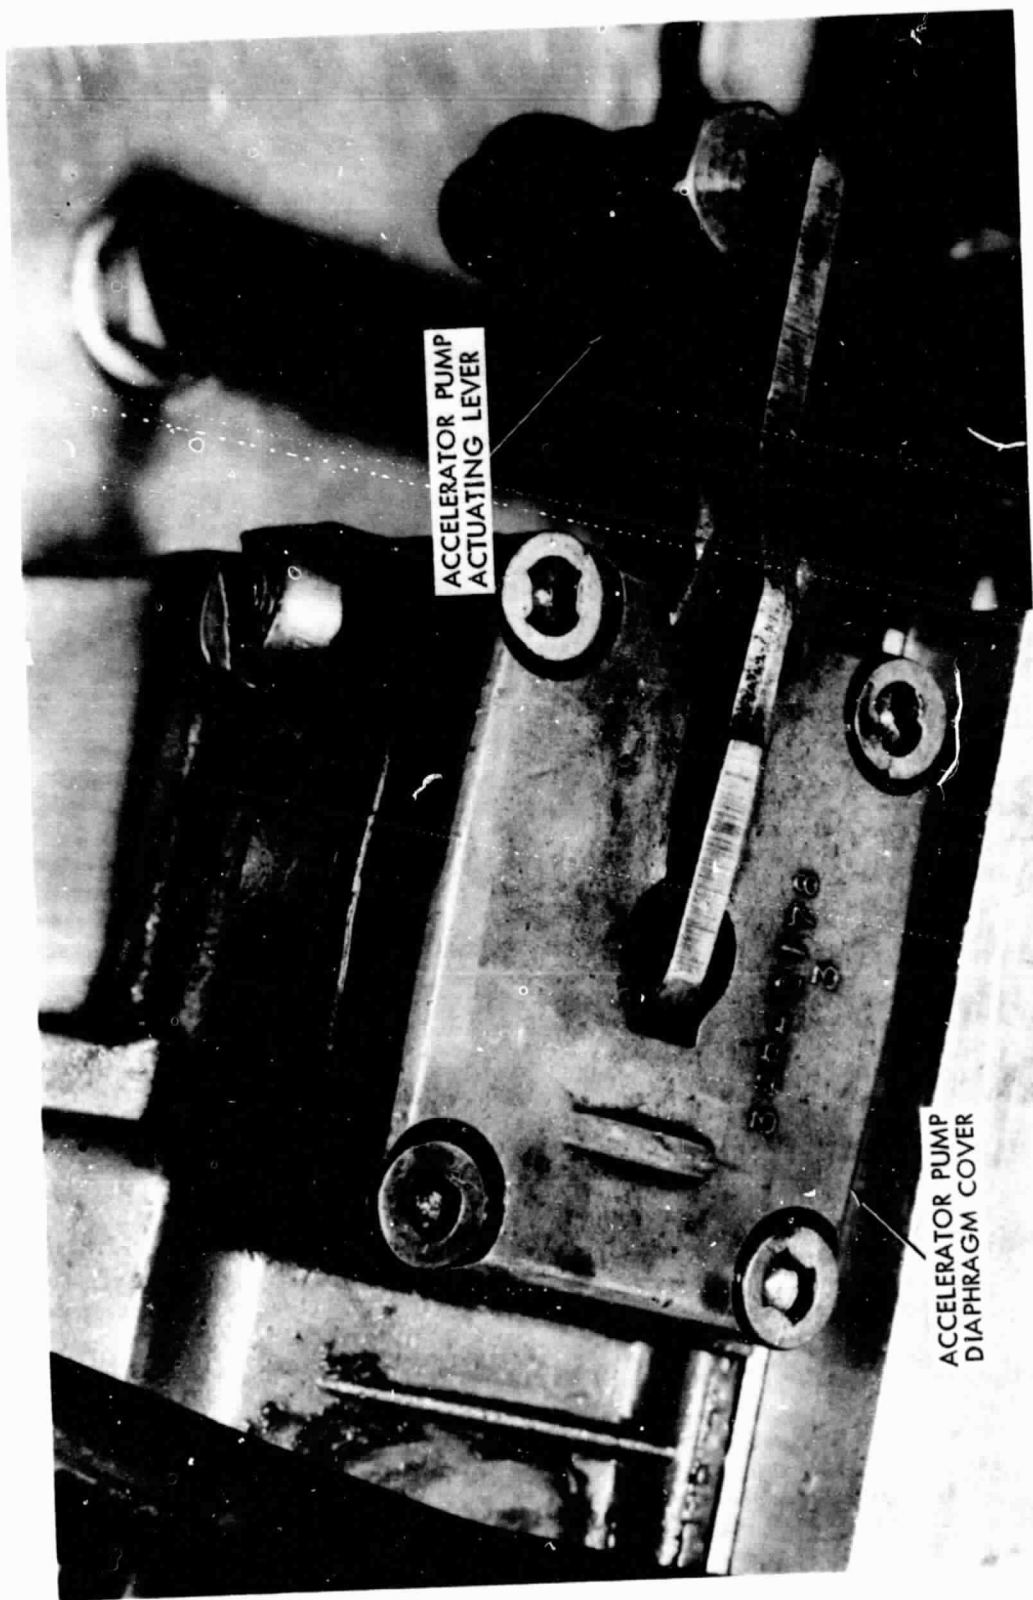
Micro-Carburetor Accelerator Pump Diaphragm Assembly
